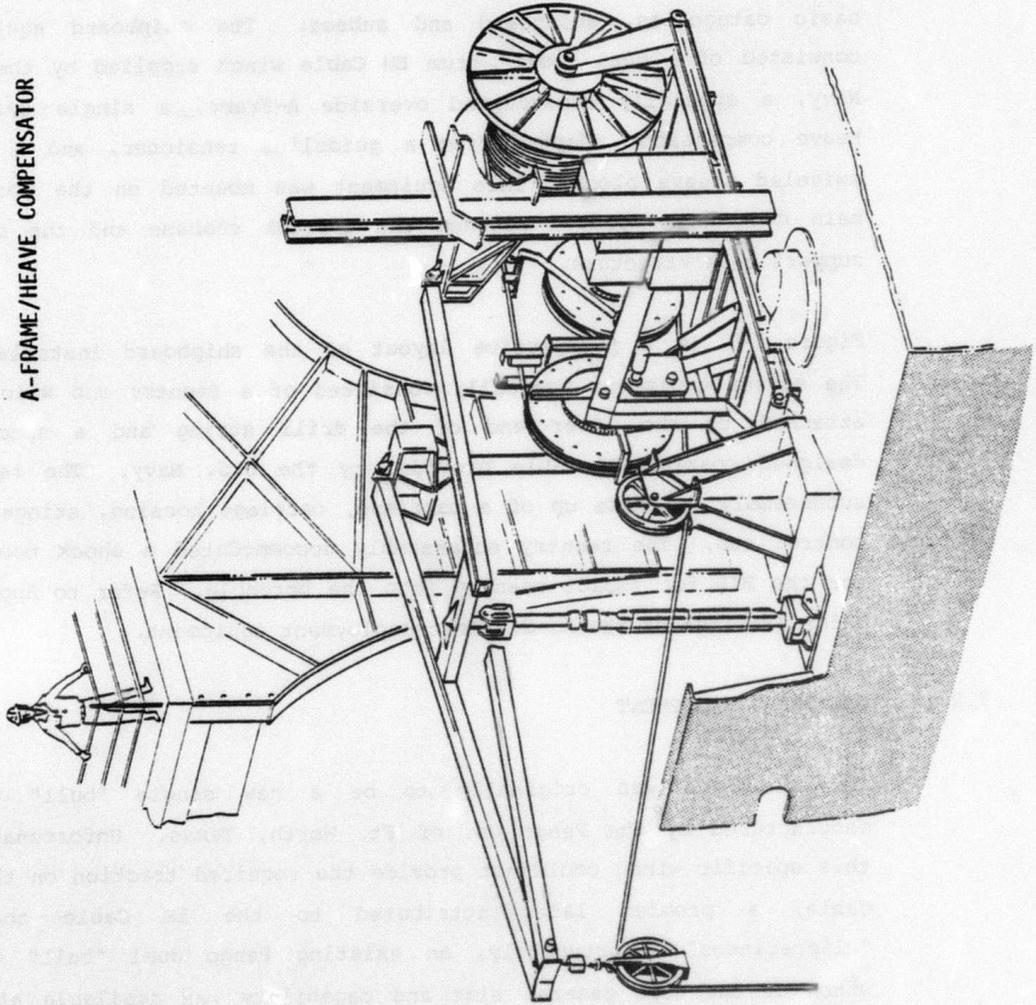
EM WINCH/A-FRAME/HEAVE COMPENSATOR INSTALLATION
